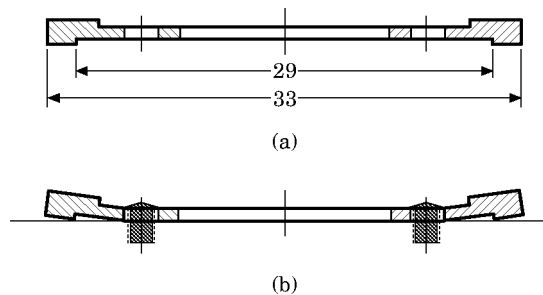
Dimension of the upper clamp (a) before and (b) after the clamping bolts are engaged.
